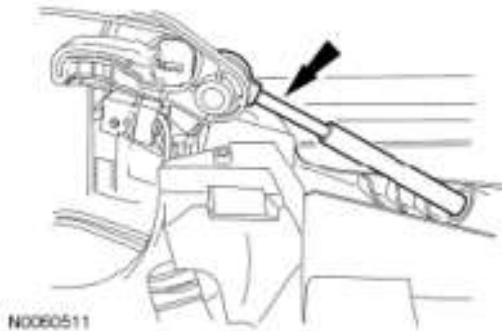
Installing Needle Bearing Remover 307-562/1 On Bearing
